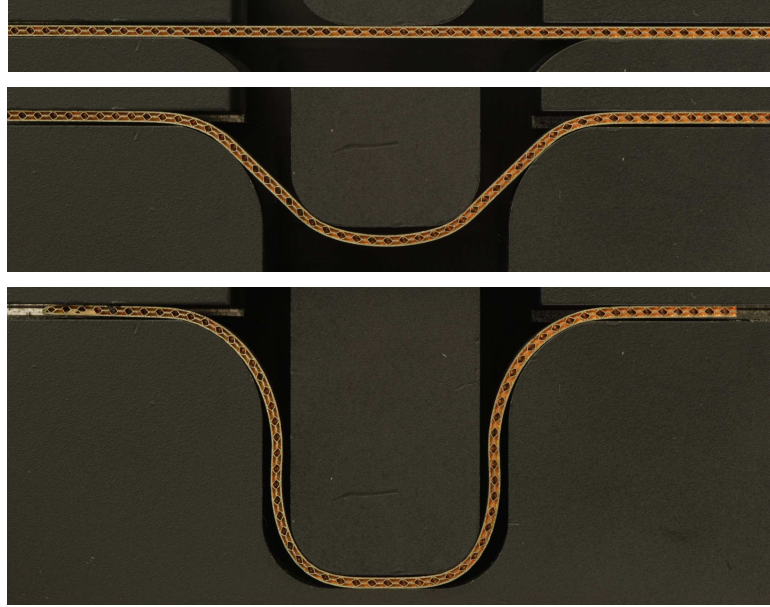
Draw bending of a prototype sandwich sheet demonstrating the formability of the sandwich sheet material.
